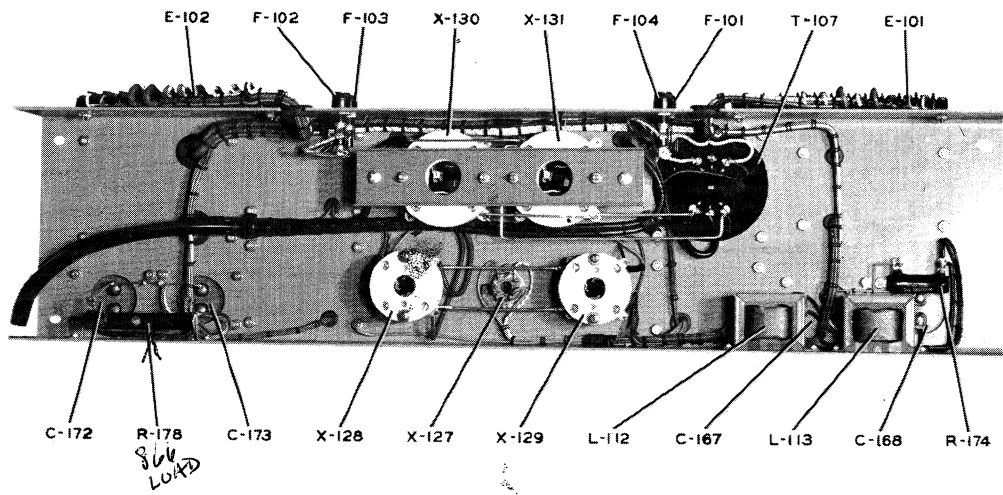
LOW VOLTAGE POWER SHELF PARTS ARRANGEMENT, BOTTOM VIEW
